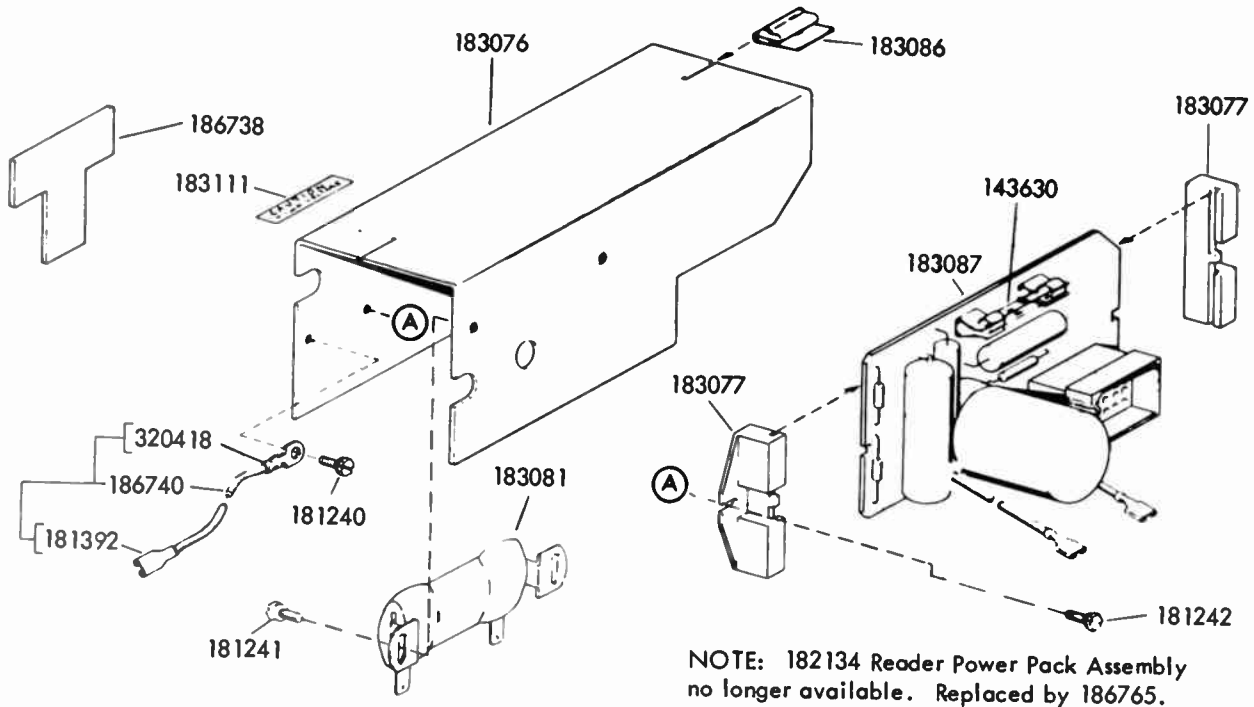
182134 READER POWER PACK ASSEMBLY
